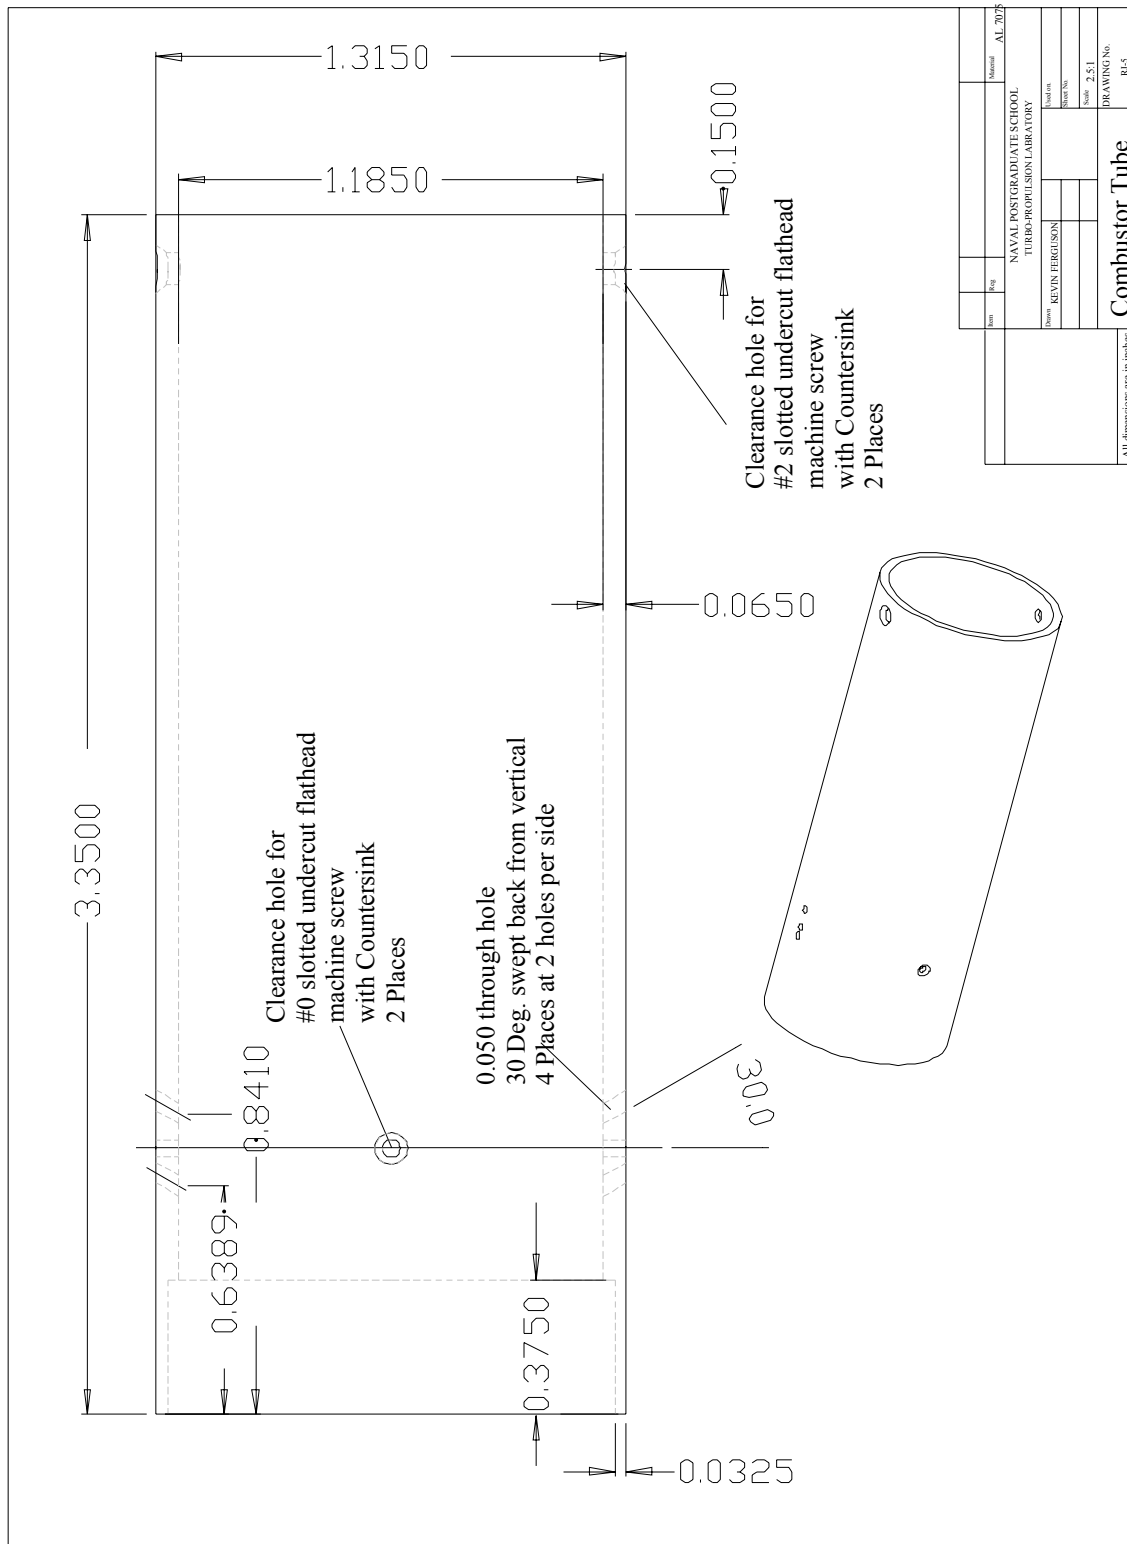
Part drawing: Ramjet combustion chamber (RJ-5)
